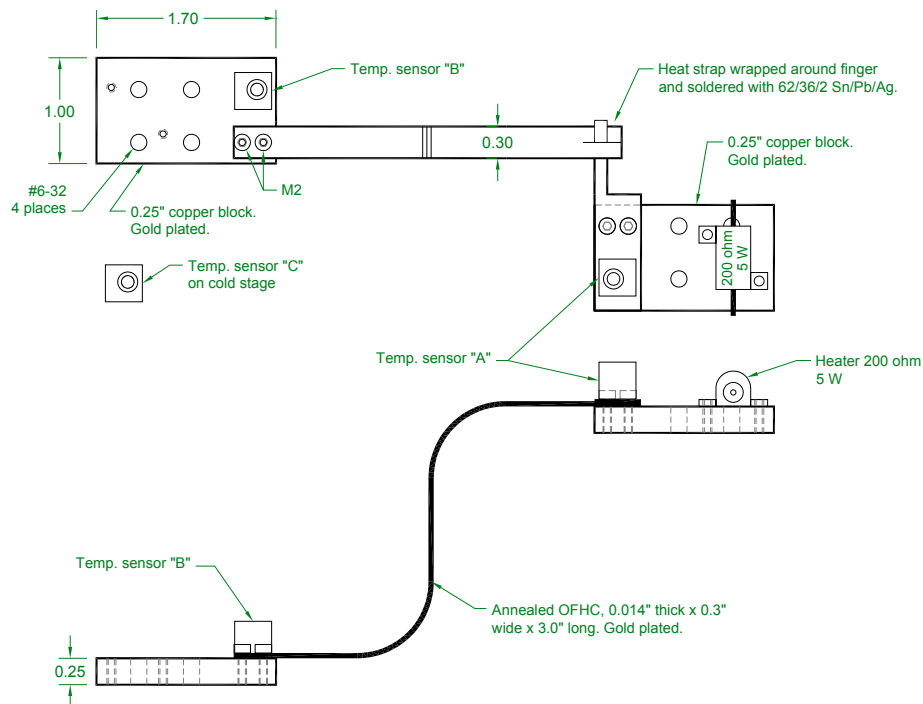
The arrangement for measuring heat strap #2. The left hand end of the heat strap is bolted to the copper block bearing temperature sensor B, which is bolted to the cold plate next to temperature sensor C. The right hand end of the heat strap is soldered to the finger projecting from the flag-shaped copper piece bearing temperature sensor A.
